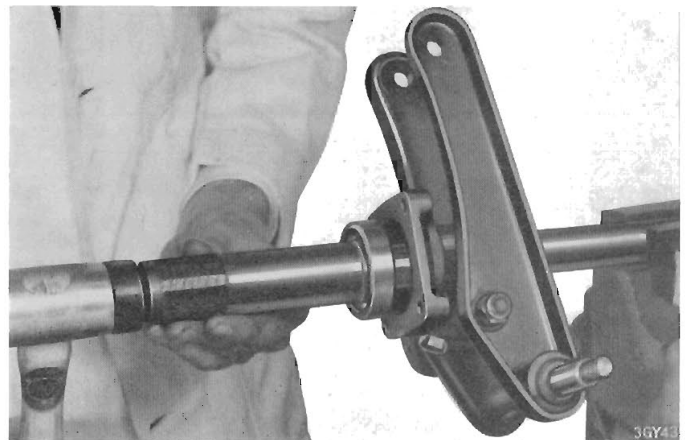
Using Churchill driver S4221A/6 to drift the ball race on to the shaft
